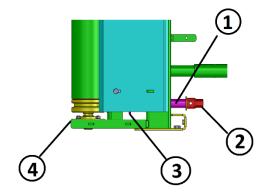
Drive Roller, Idler End Key 1 – Adjuster Key 2 – Shaft Key 3 – Adjuster Key 4 – Flush Point
